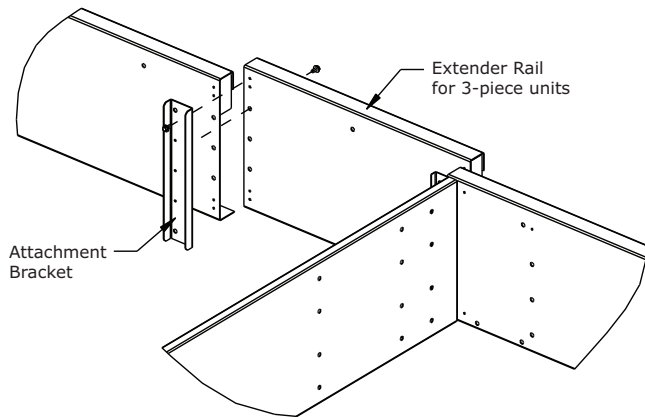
Typical attachment of return air duct assembly with end rail and side rail
